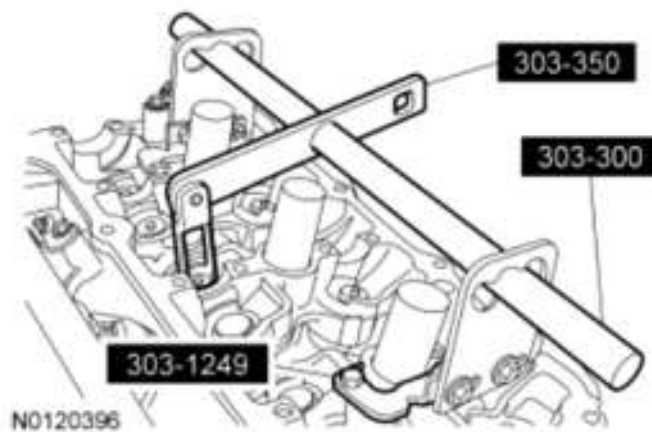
Removing Keys, Retainer And Spring Using Valve Spring Compressors
